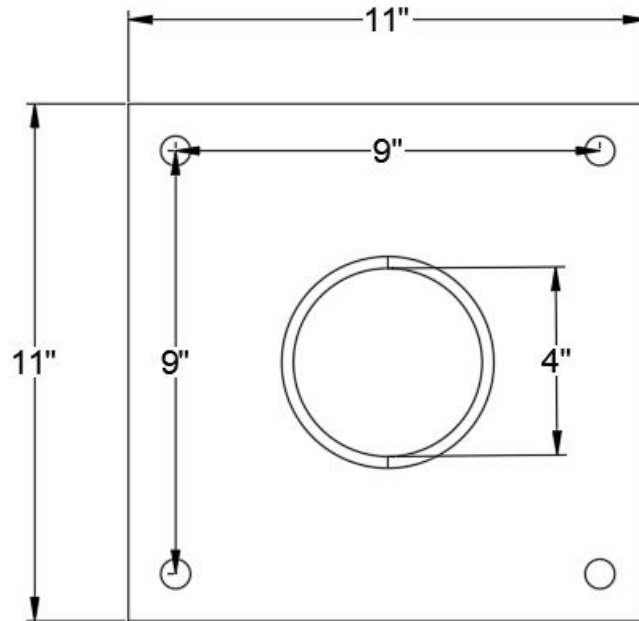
Plan View of Modified Test Frame Base Plate with Dimensions
